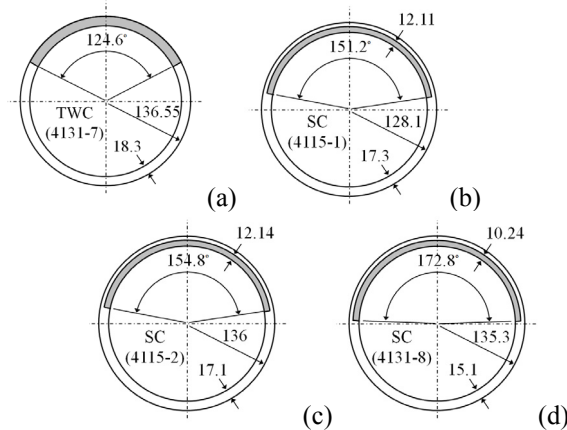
Schematic of the cross-sectional view for SA333 Gr. 6 pipes in Table 1: (a) through-wall cracked pipe and (b)-(d) surface cracked pipes.
